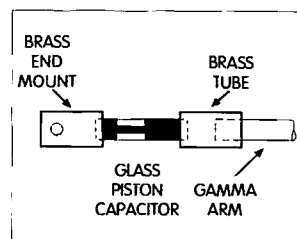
The first attempt at constructing the gamma match section with a glass piston capacitor soldered to small sections of brass tubing for connections to the mounting insulator and gamma aluminum rod.
